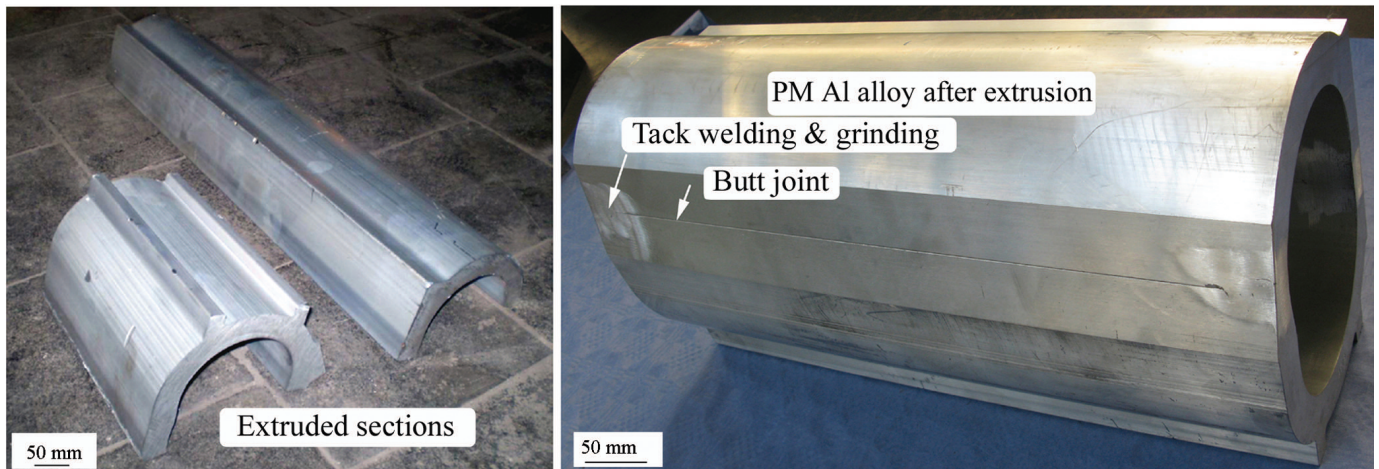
Samples of extruded sections and the joint configuration before welding.
